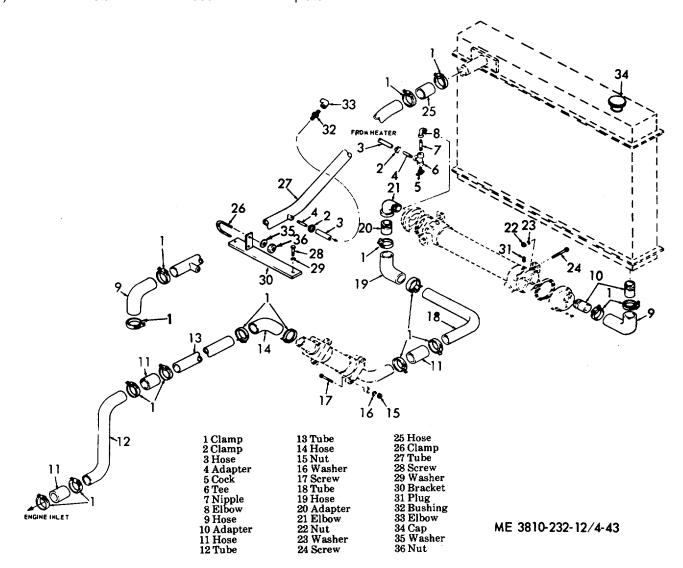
Carrier engine coolant lines, and fittings, removal and installation (Model 2385).
